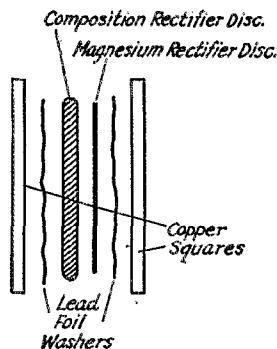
A SINGLE RECTIFIER ASSEMBLY
